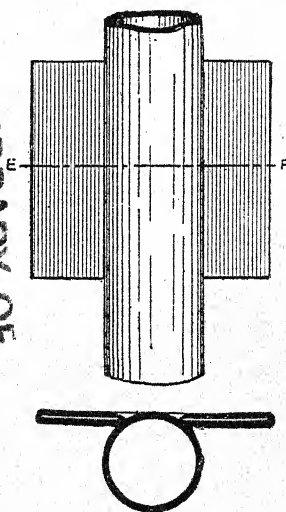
Elevation and Section of Folding Tack and Pipe.
